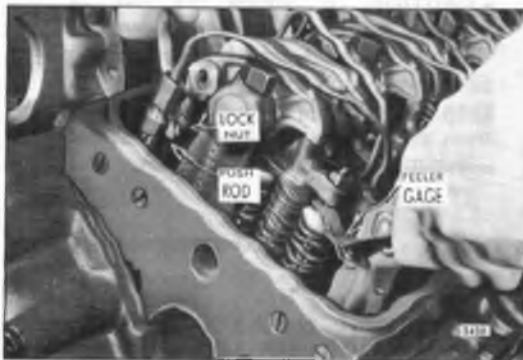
Adjusting Valve Clearance (Spring-Loaded Valve Bridge)
